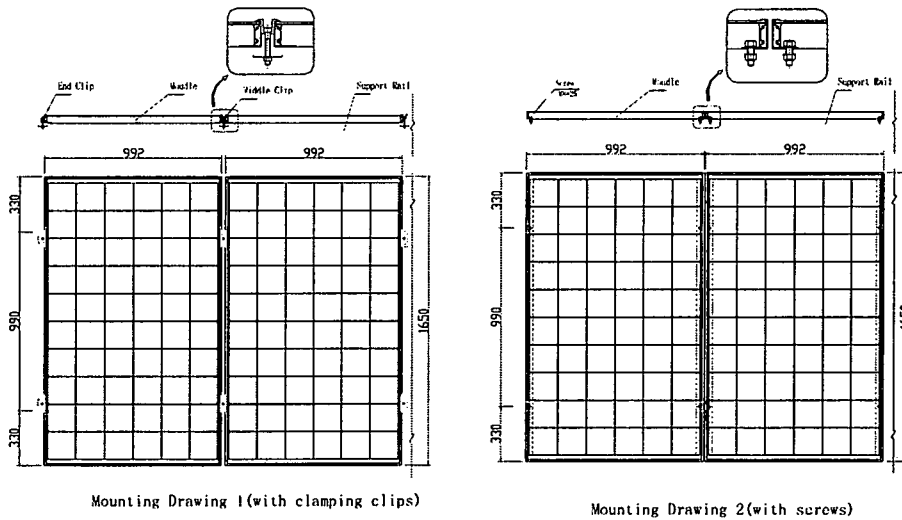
Mounting drawing for 6\*12-125 SPV Module (with clamping clips and screws)
